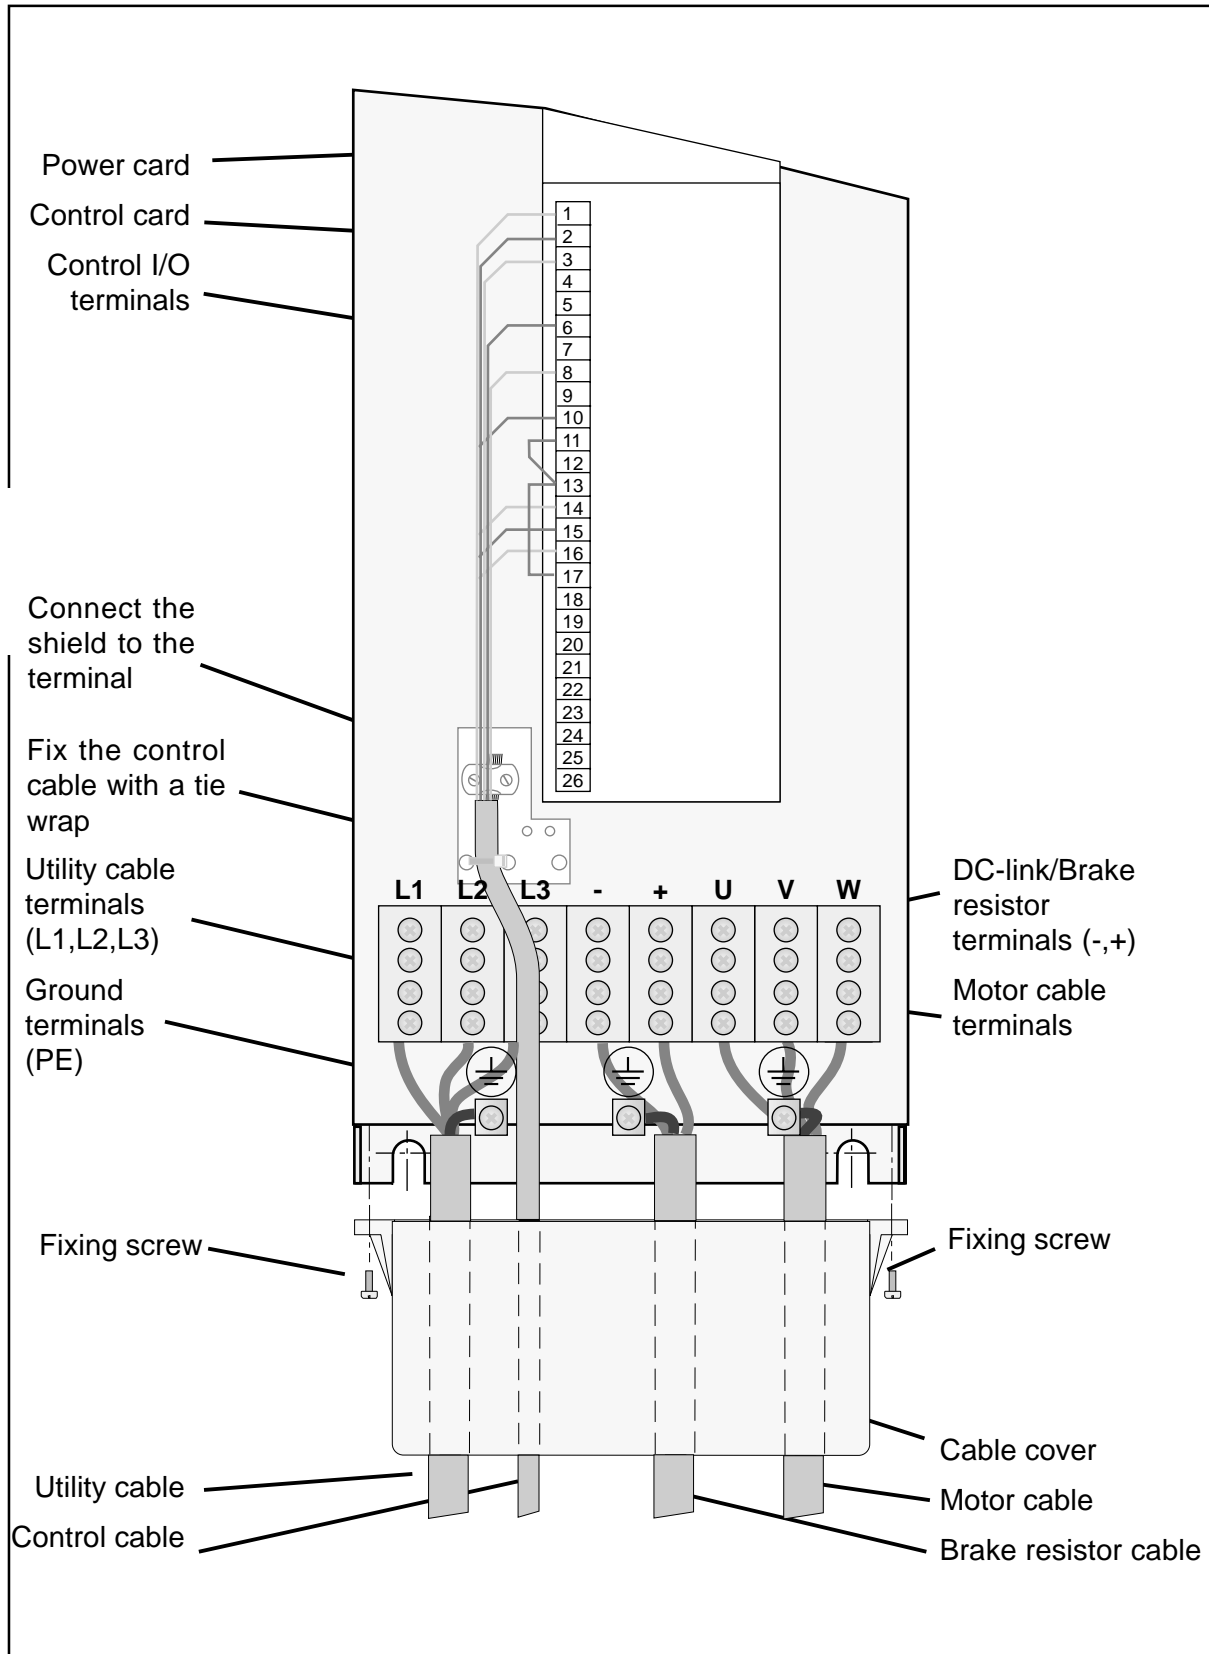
Cable assembly for open chassis: CX 0250-0600HP V 3 4/5 and CX 0150-0300HP V 3 2.
